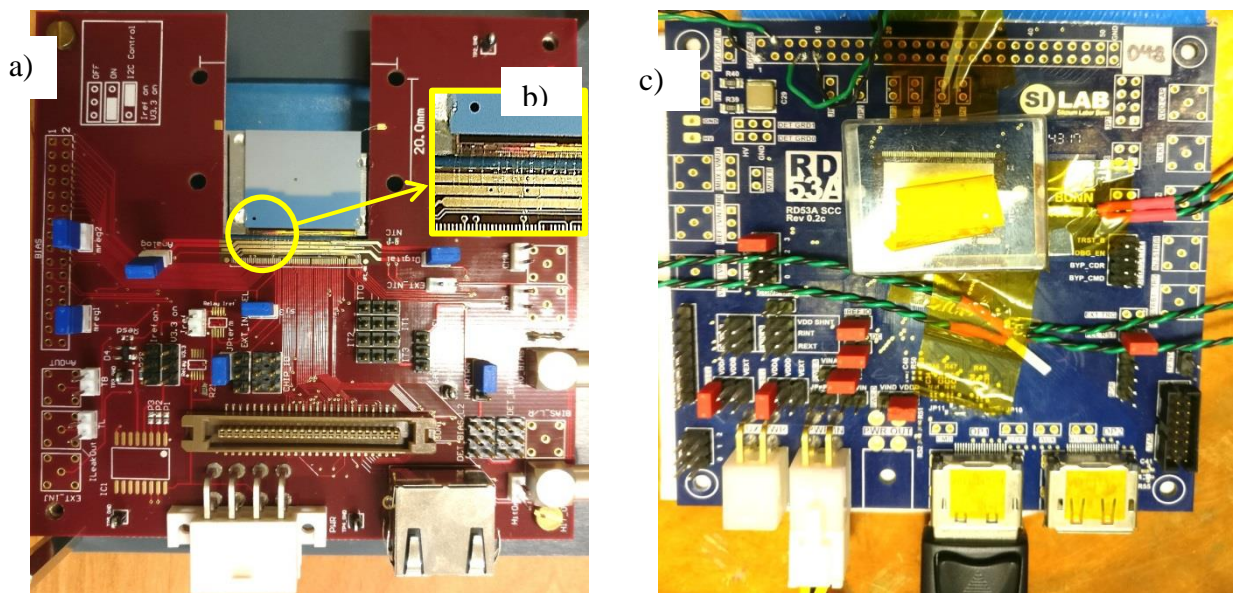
A picture of DUT single chip card (SCC): (a) shows a SCC with FE-I4 single chip assembly used for IBL Upgrade; (b) shows the assembly attached to the PCB by wire-bonding; (c) a SCC with RD53A chip, which is a large scale demonstrator for a hybrid pixel detector readout chip in a 65 nm process, common ATLAS and CMS effort.
